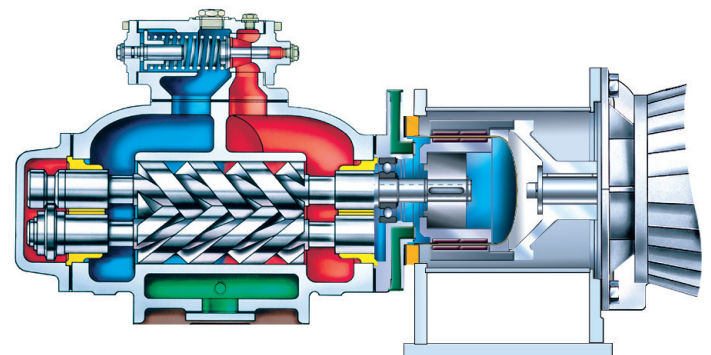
Cross-sectional drawing of screw pump type L2NG with magnetic coupling
